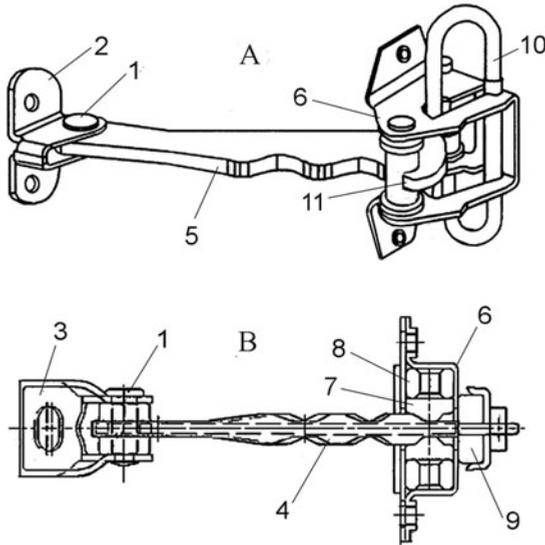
A) door brake of shaped rod plate; B) three dimensional rod brake. 1) hammer pin; 2) two fittings clevis; 3) one fitting clevis; 4) thickness shaped rod; 5) shaped rod plate; 6) cage; 7) plastic sliders; 8) elastomeric springs; 9) end bumper; 10) torsion spring; 11) end hook.
